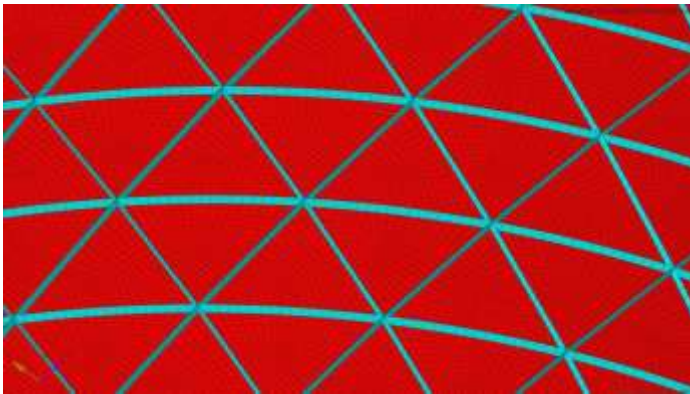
Configuration-5 Iso-grid stiffened bypass duct
